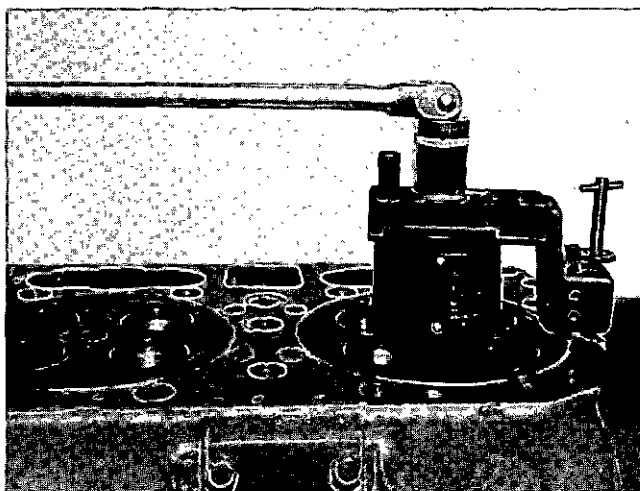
, V40223. Regroove cylinder head with ST-913
